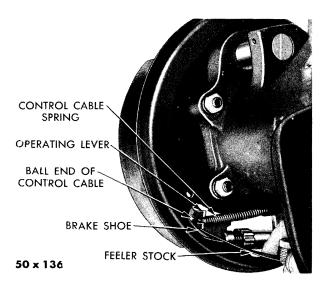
Clearance Between Lever and Brake Shoe Table (Typical)
